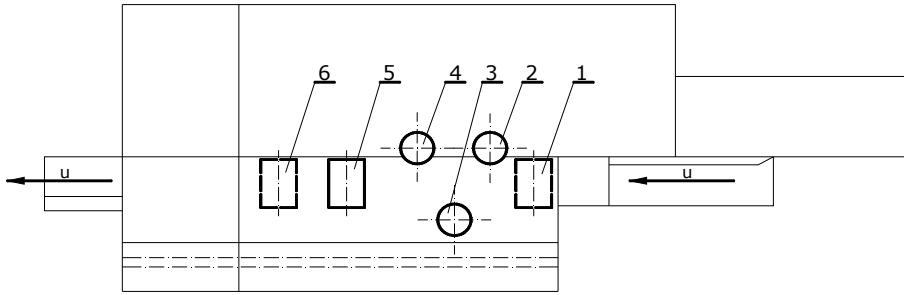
Spindle setup of the four-side planing machine type U23: 1, 2 – heads forming bases, 3 – tongue-forming cutter, 4 – profile cutter forming the groove, 5 – head forming the bottom part, 6 – head forming the top part
